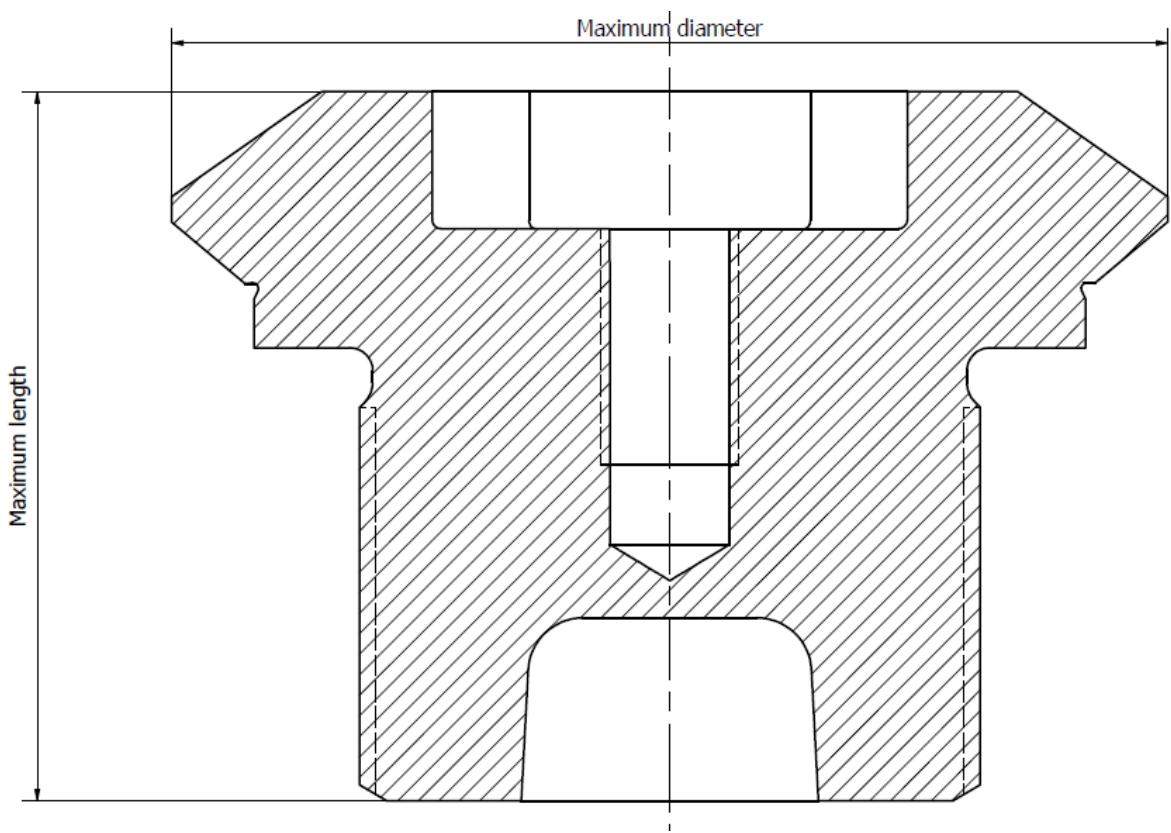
General geometry of a locking bolt in section view.
